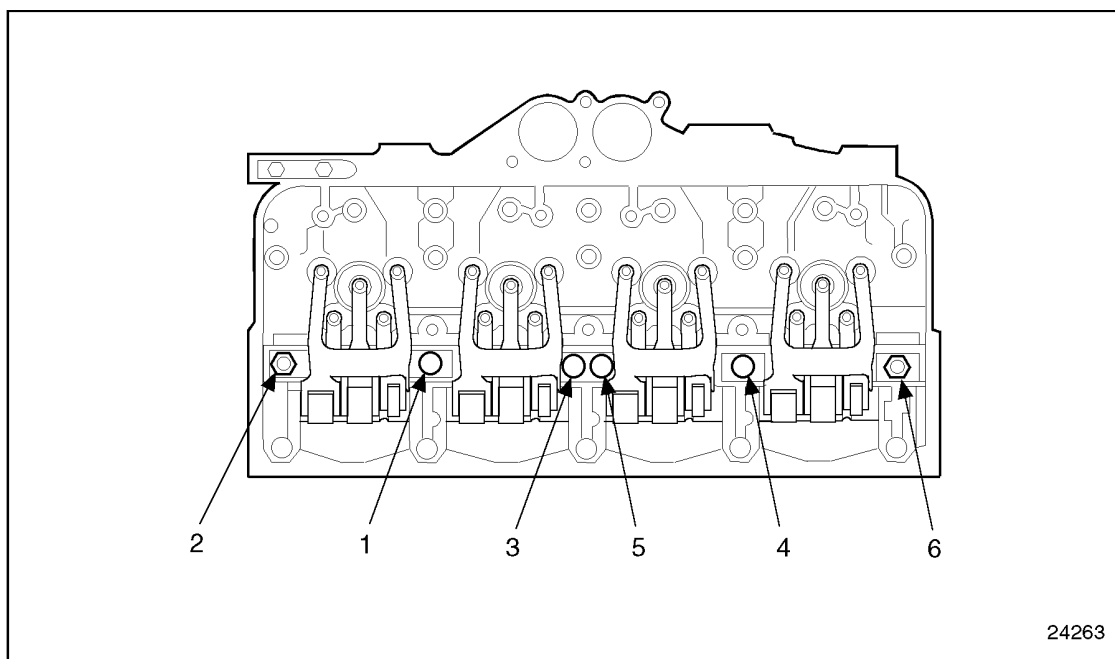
Rocker Arm Shaft Bolt and Nut Torque Sequence
